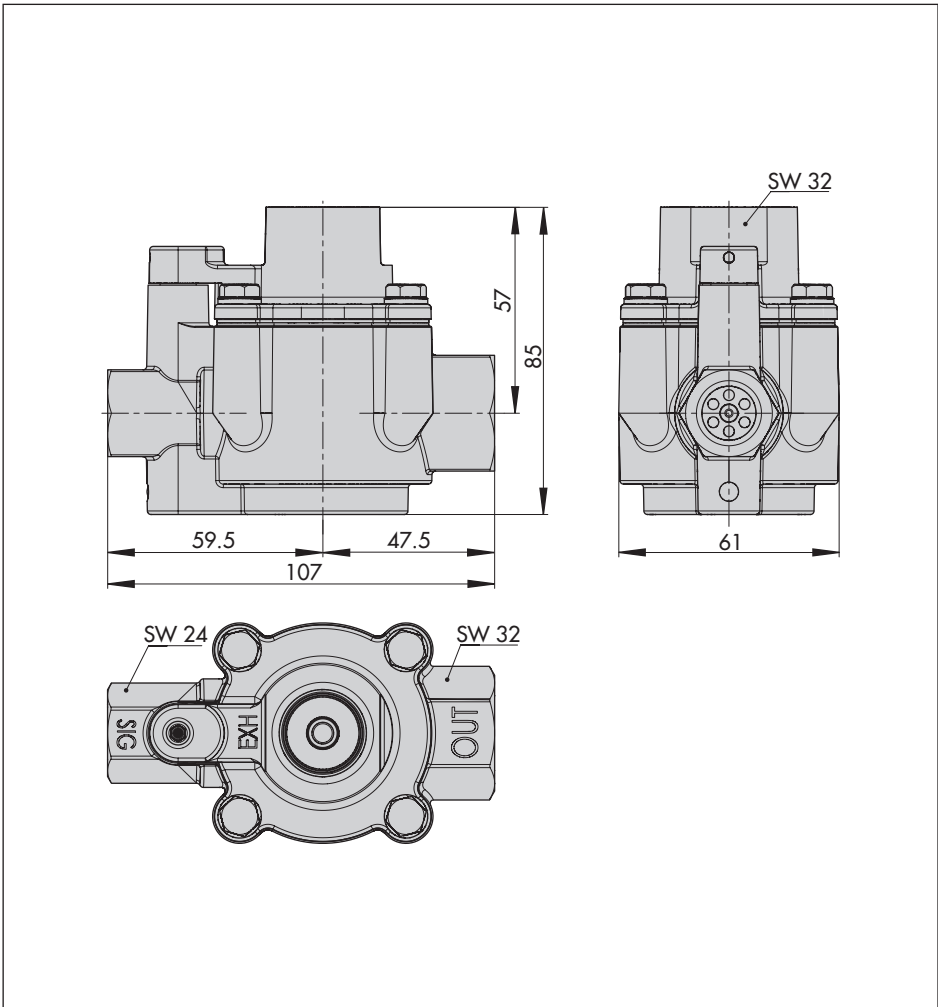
Sectional drawing of Type 3711 Quick Exhaust Valve including ports
